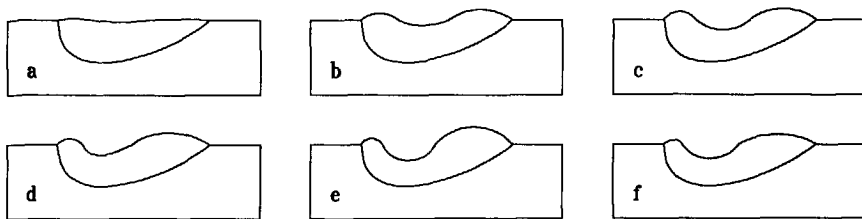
Schematic drawing of observed weld pool surface movement in the case of mode 1 oscillation (stationary arc welding) based on the analysis of film 1.
